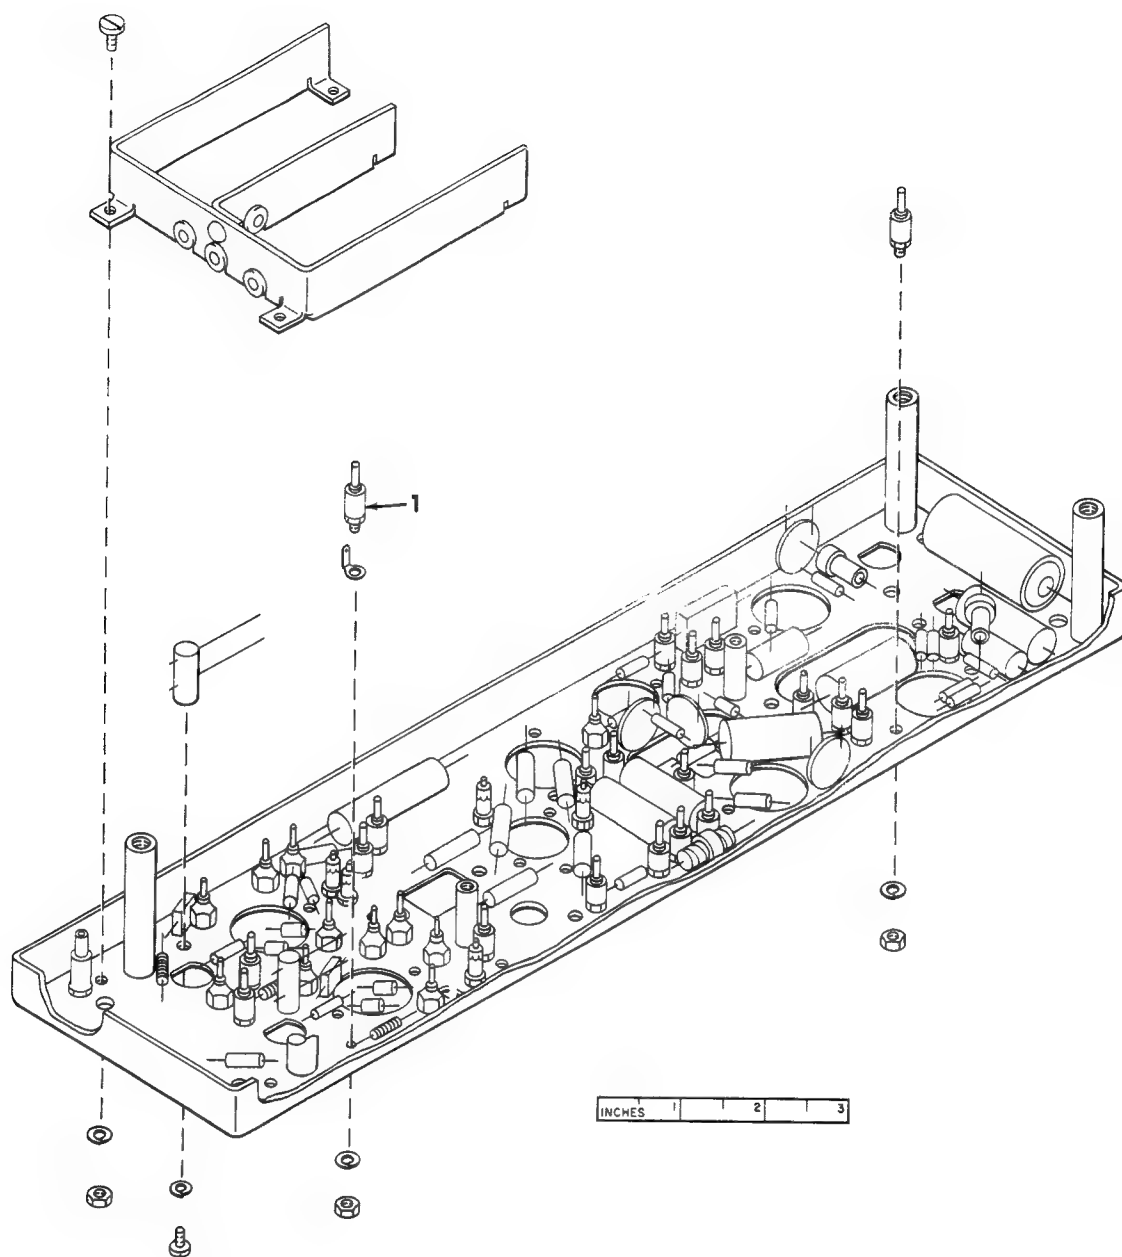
Detector, radio frequency (9009270)—partial exploded view
